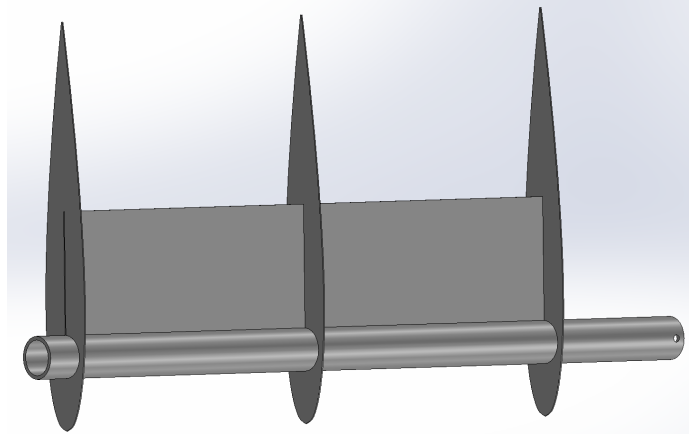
SolidWorks model of rudder stock with spoke design.
